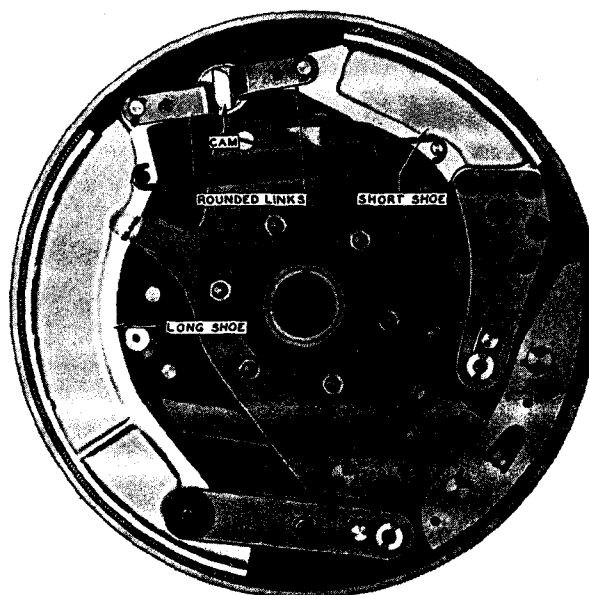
Cadillac left rear brake showing foot brake shoes.
